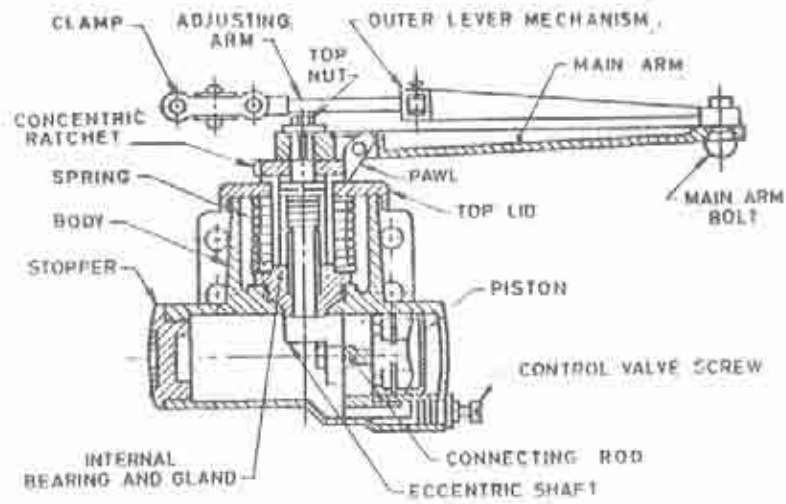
TYPICAL SKETCH OF HYDRAULIC DOOR CLOSER SHOWING MAIN COMPONENTS
